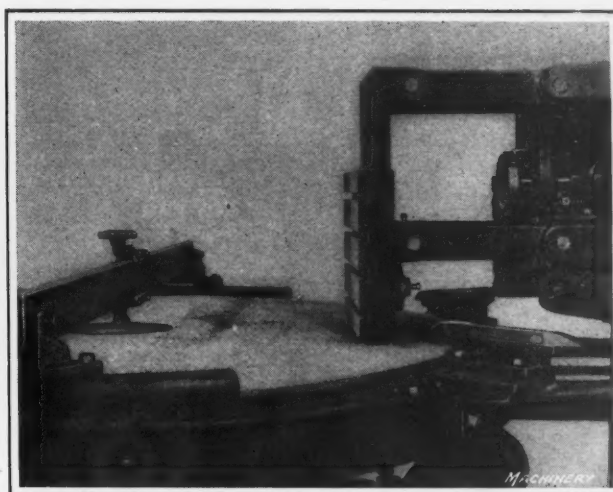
Detail View of Table which is at Right Angles to Grinding Wheel, thus insuring Accurate Grinding
